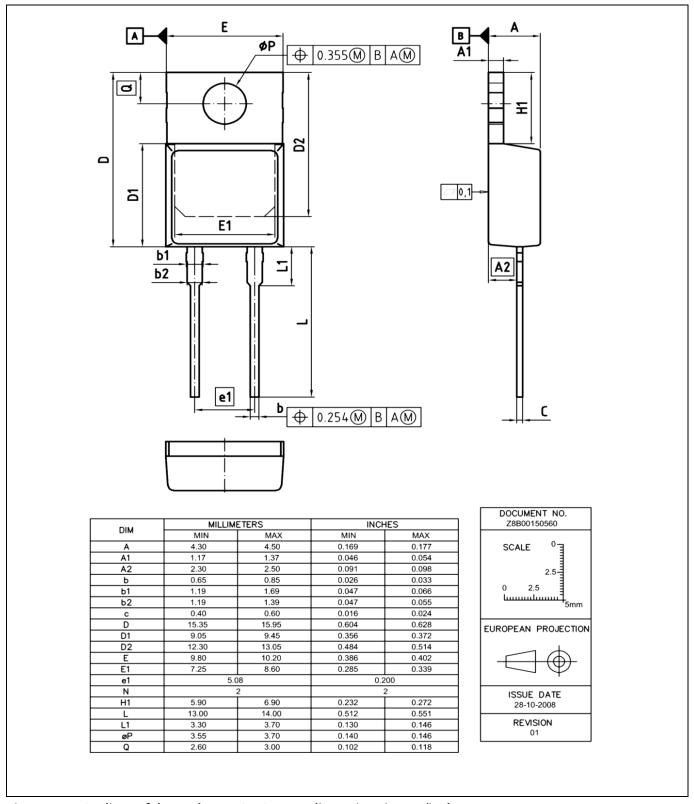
Outlines of the package PG-TO220-2, dimensions in mm/inches
